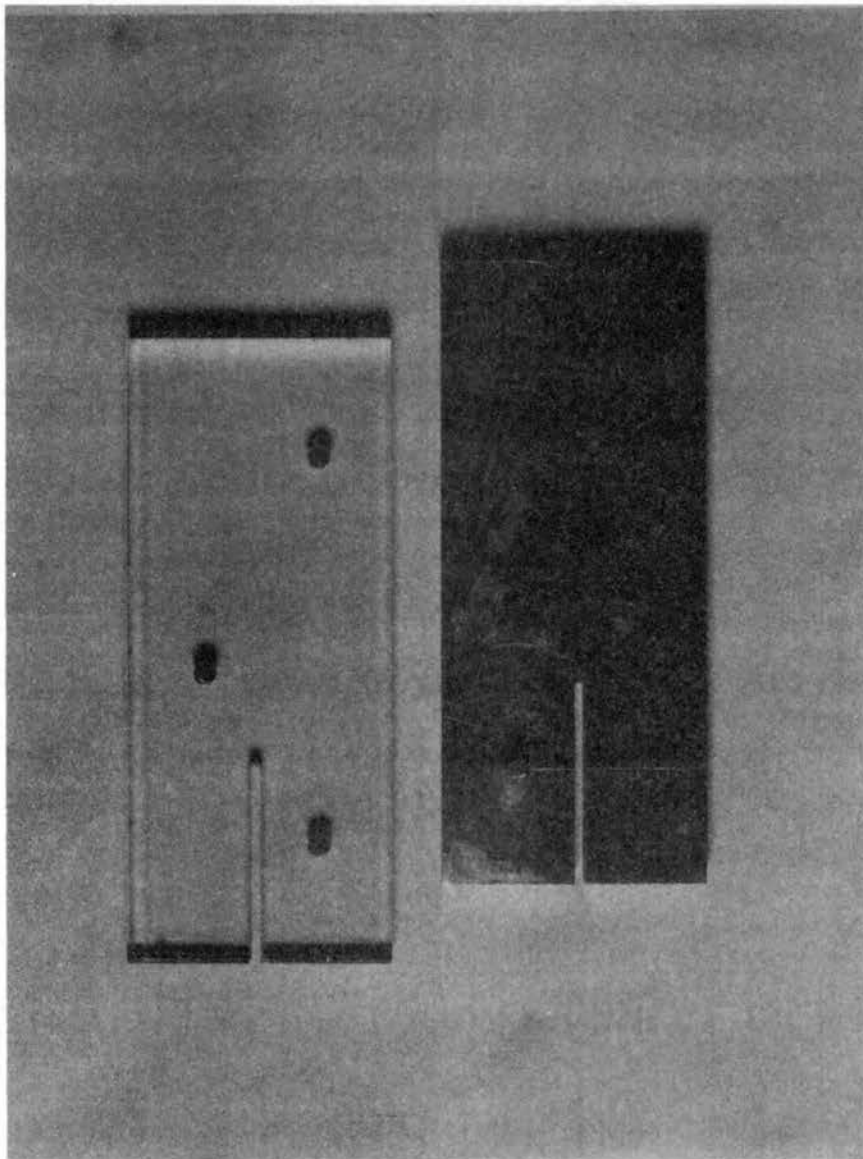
Plexiglass and Aluminum Holder Showing the V-Cut
